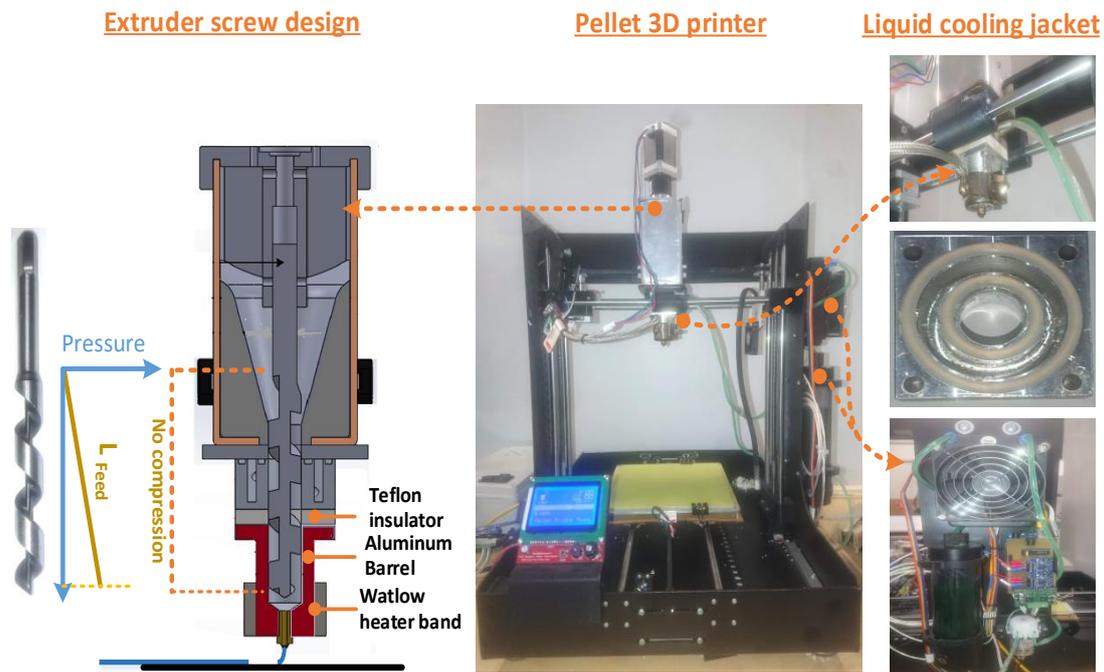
Illustration of different parts of pellet 3d printer [73] and the modifications in extruder screw and cooling system.
